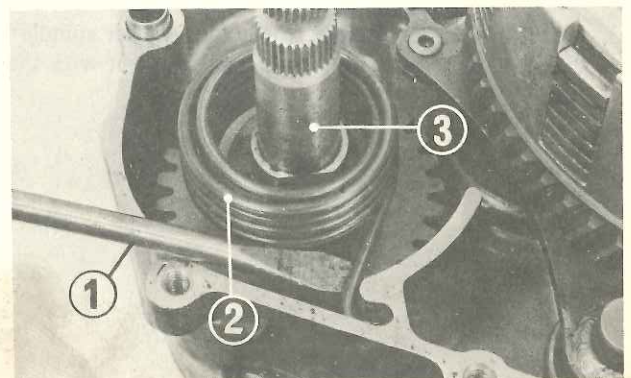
(1) Standard screwdriver (2) Kick starter spring (3) Kick starter spindle
